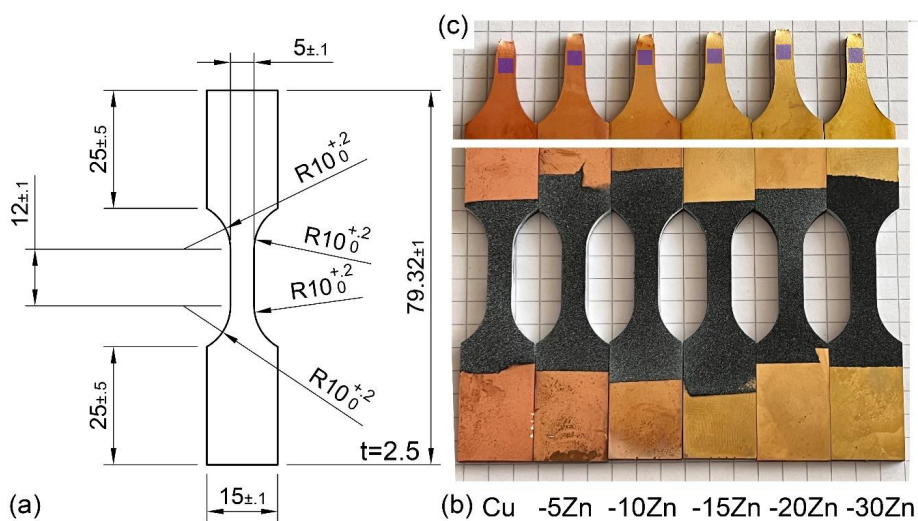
Specimen's shapes dimensions: (a) CAD drawing (b) a set of specimens with different Zn content and with a speckle pattern painted on the surface for DIC measurements and (c) fractured specimens with paint removed; the regions of interest (ROI) for SEM/EBSD examinations of the deformed microstructures are indicated in blue. The surface of the ROI was polished mechanically and, finally, by ion milling prior to SEM/EBSD observations.
